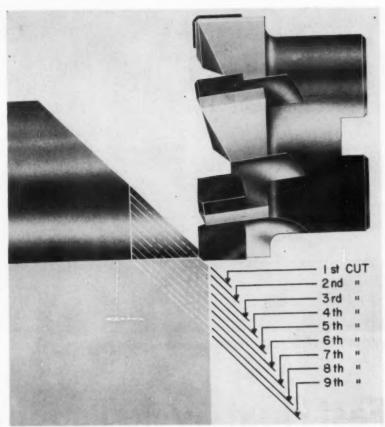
Old method used shell mill with brazed carbide tips, took nine passes and 30 minutes to machine the shell forcing angle.
